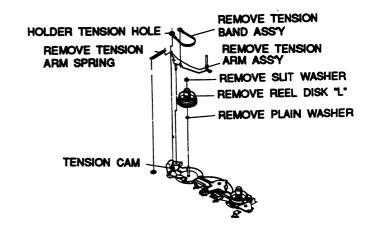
Reel Disk "L" Tension Band & Tension Arm Removal
